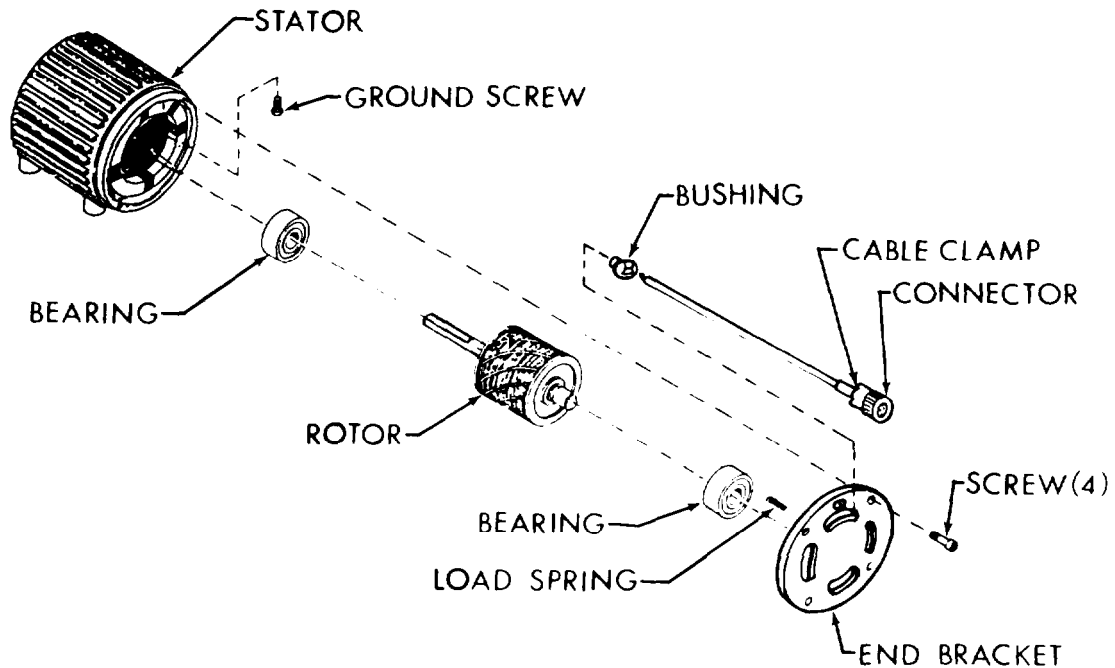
Motor Assembly, Custom Motor Design, Model 700-01-0602
